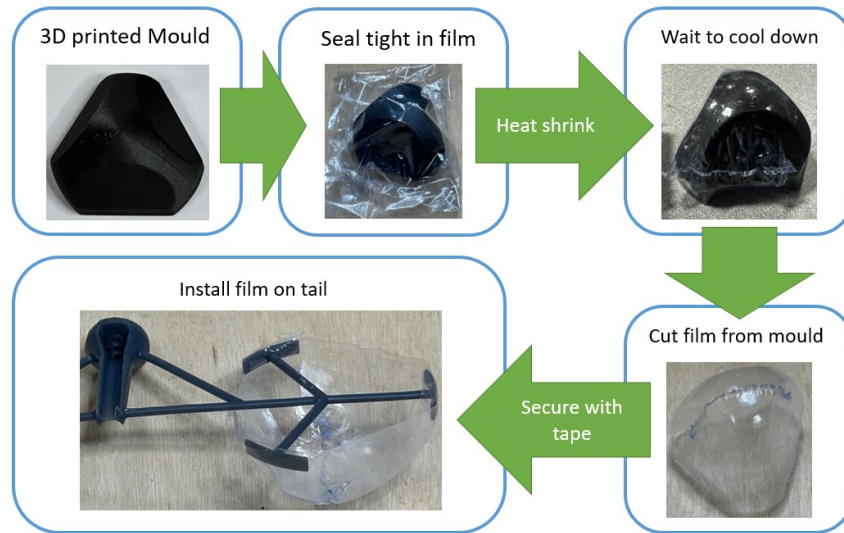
The manufacturing process involves several stages: enclosing the 3D printed mould within the film bag, applying heat using a heat gun; once cooled, the shaped film is cut from the mould; and finally, the film is secured onto the tail frame with adhesive tape.
